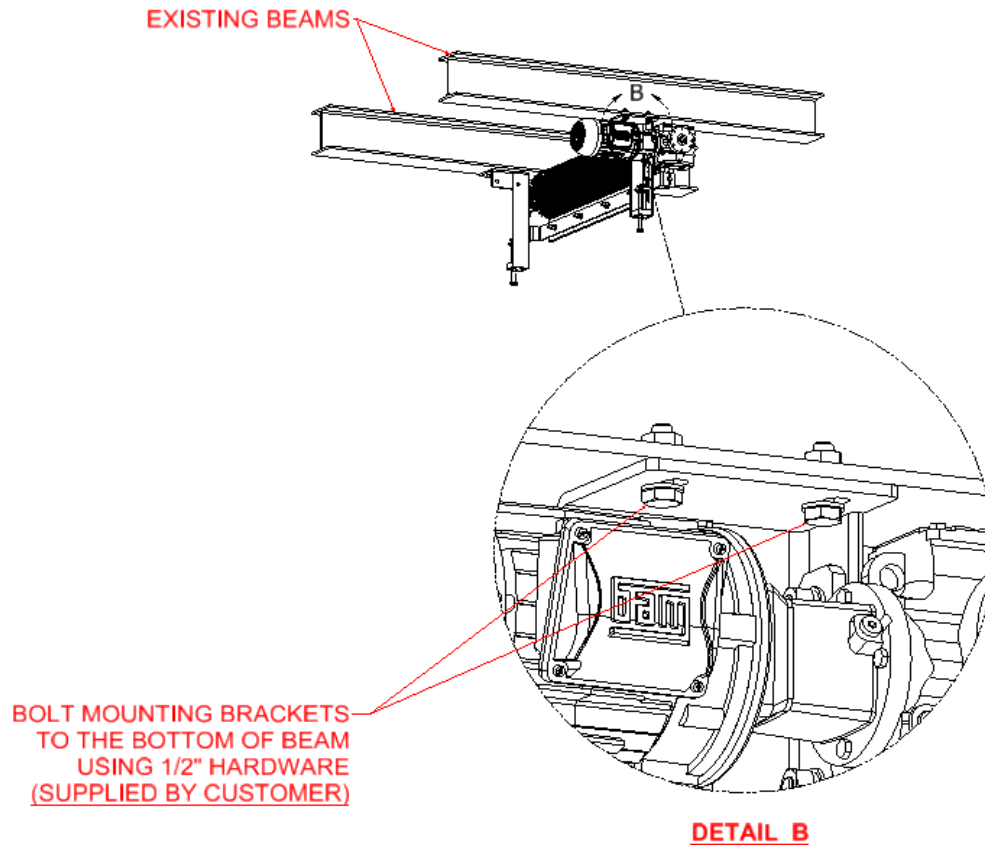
illustrates mounting the brush cleaner to existing beams using customer supplied 1/2" hardware. This mounting option is most commonly used when mounting the brush cleaner near the conveyor head pulley.
